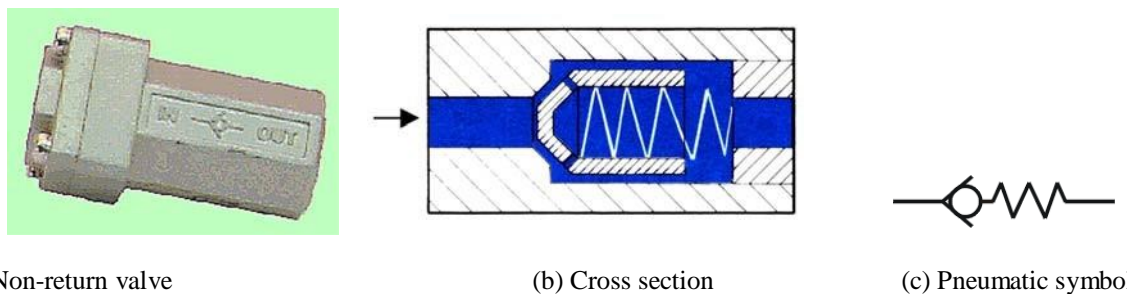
a non-return valve with its cross-section drawing and pneumatic symbol [14].
